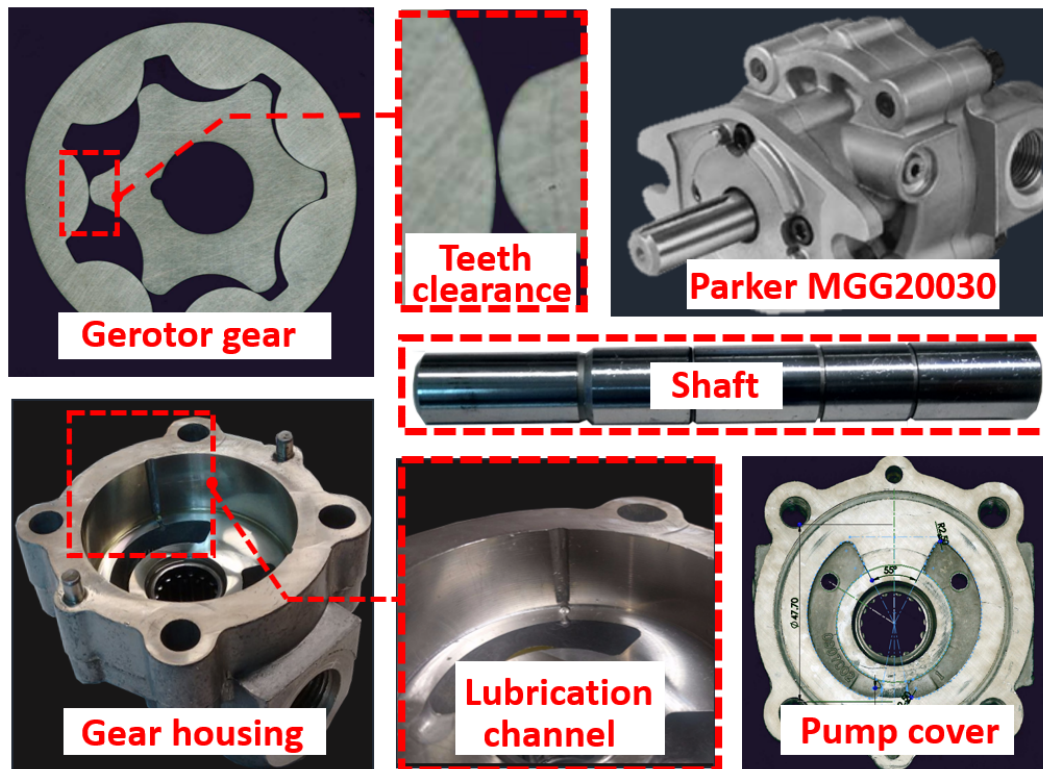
Disassembled components of Parker Hydraulic Motor MGG20030
